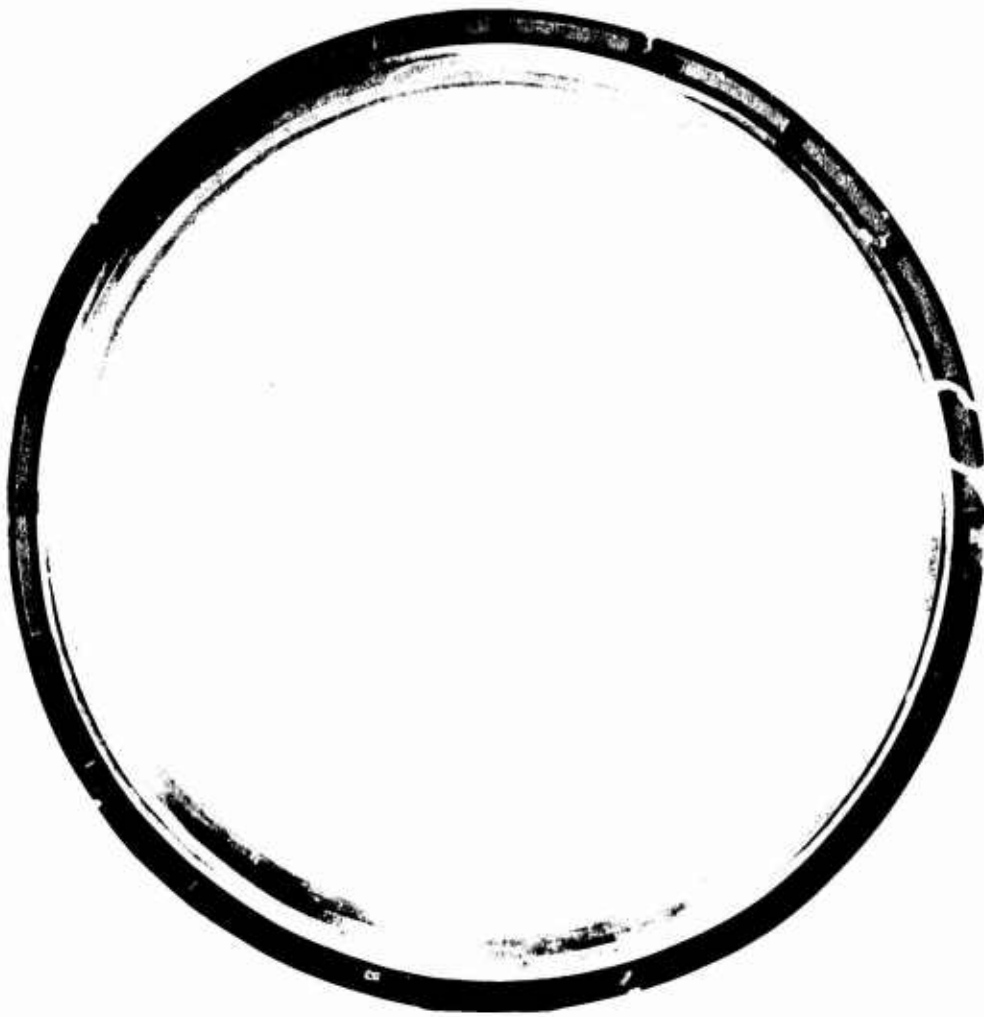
Axial View of Regenerator I.D. Ring Seal, Back-to-Back Segmented Carbon Seal.
